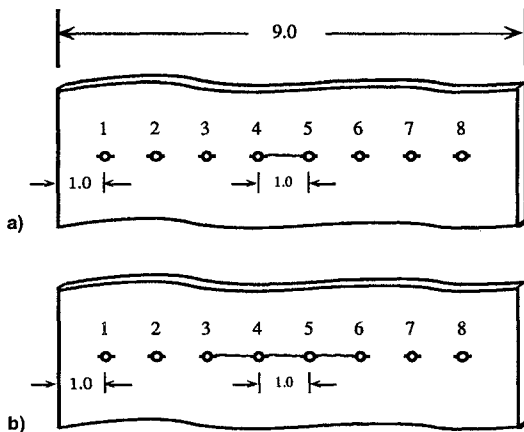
Schematic view of hole spacing and crack configurations for various type B MSD specimens. Nominal hole diameter is 0.16 in. and specimen width is 9.0 in. Specimens a) MSD05 and b) MSD06.
